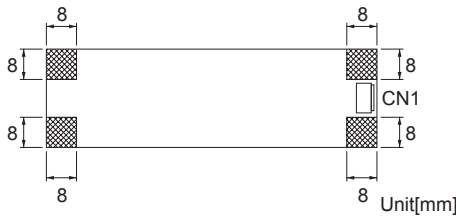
CR-HUT□-1 Allowance of metal for mounting
